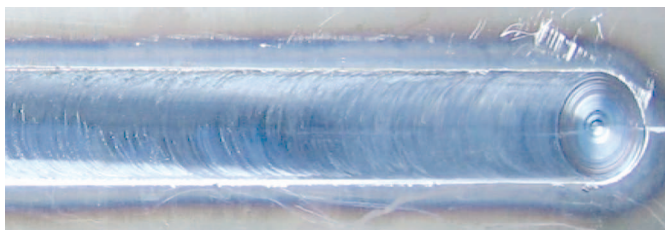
The appearance of the FSW-TIG welded joint with a smooth conical pine too (v=40 mm/min)
